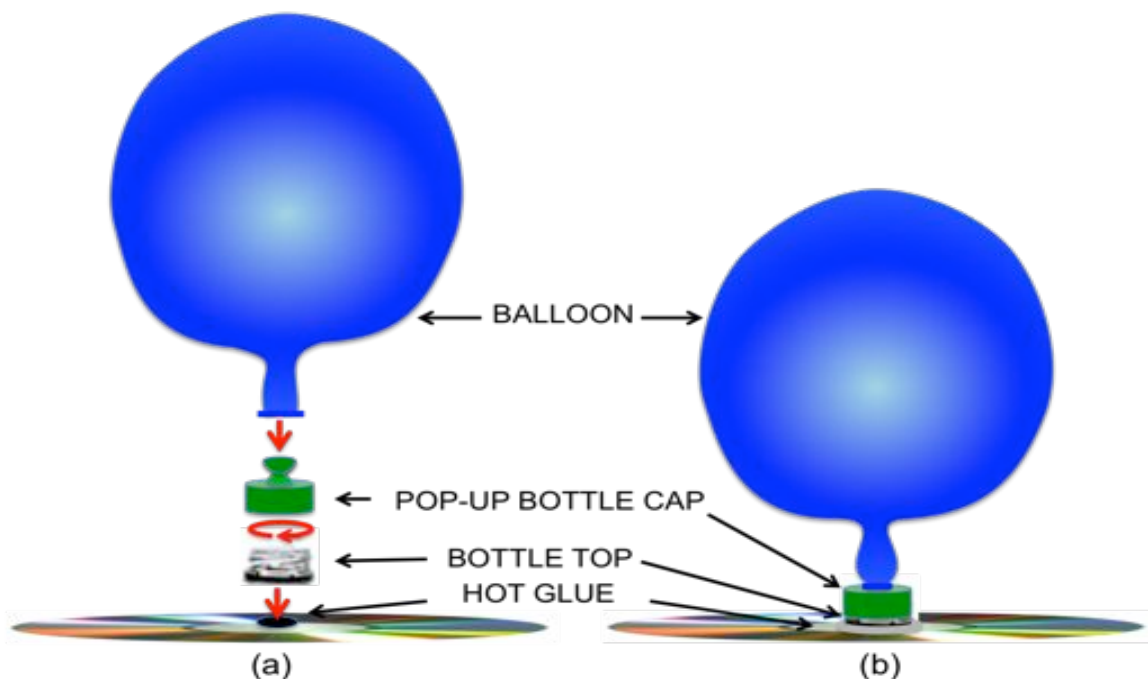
(a) Assembly Diagram and (a) completed form of Design C
